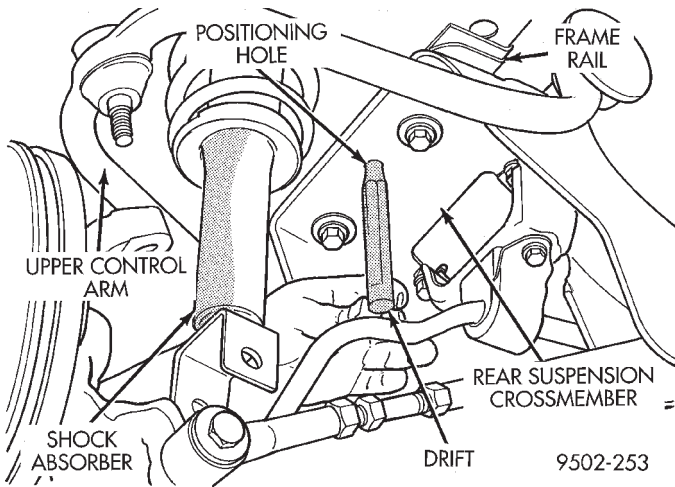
Locating Rear Suspension Crossmember In Vehicle
